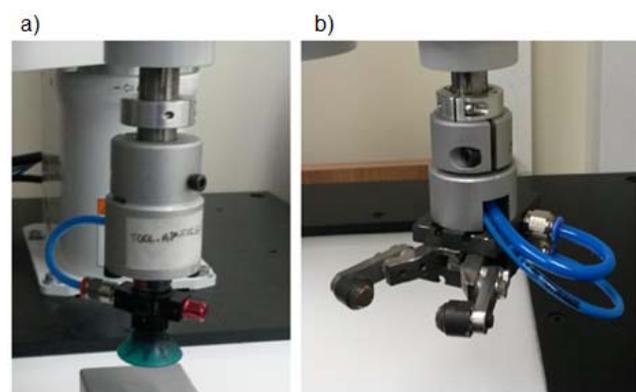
Working tools of the tested robot: a) original tool - suction cut, b) adapted tool – gripper
